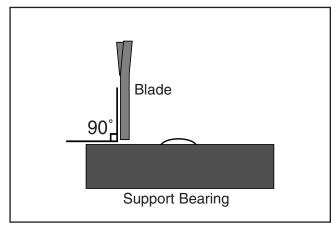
Illustration of blade set perpendicular (90°) to the support bearing face.
